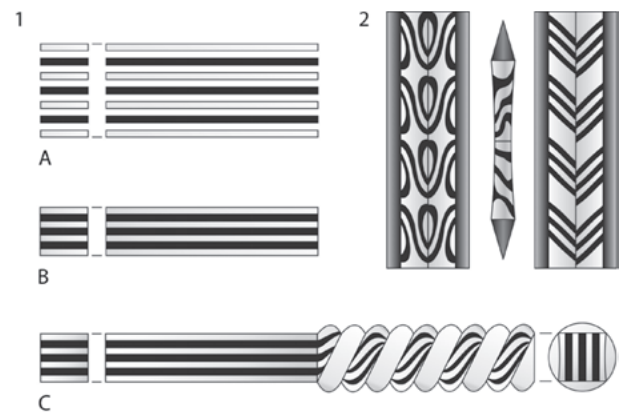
Consecutive steps of forging a pattern-welded blade. Drawing by P. Kucypera.
